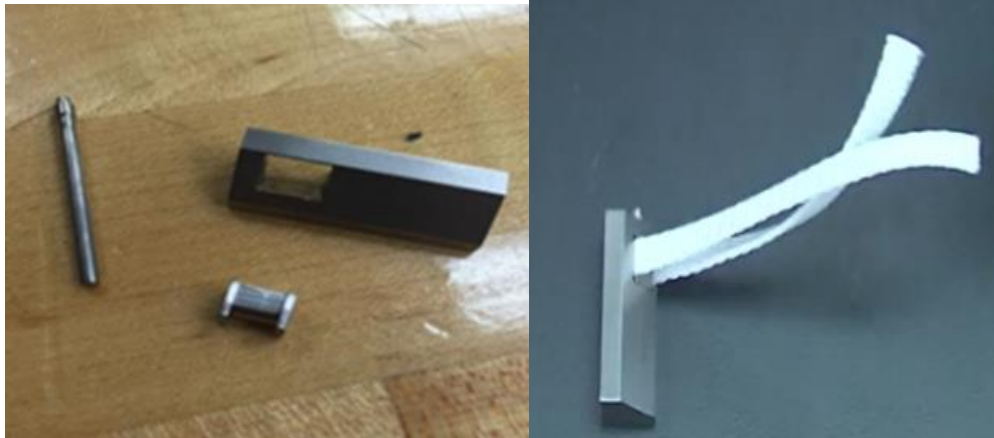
Attachment mechanism (left) and assembly with ligament (right)
